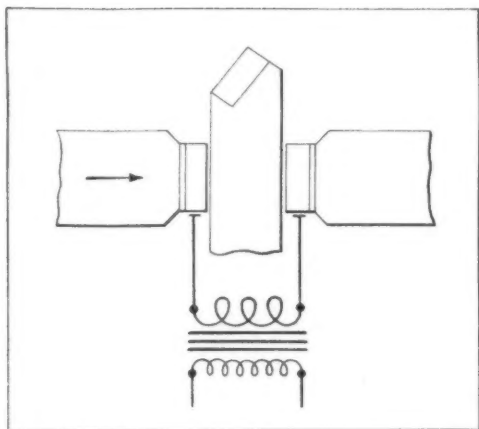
Preferably, the heating equipment for raising the tool to the required temperature prior to and during grinding should be incorporated in the machine. This diagram shows a resistance heating set-up with a pair of insulated vice jaws
